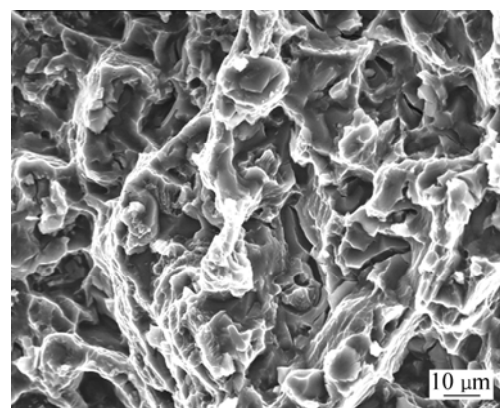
Fracture surface of sample after gas bubbling and filtration
